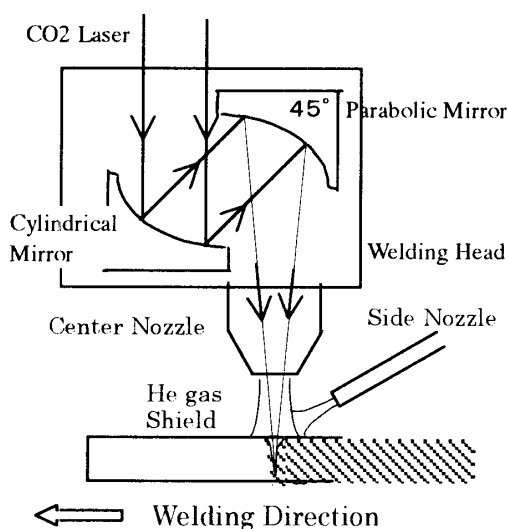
Schematic of 12t API X65-AlSi Steel Plate Welding.
